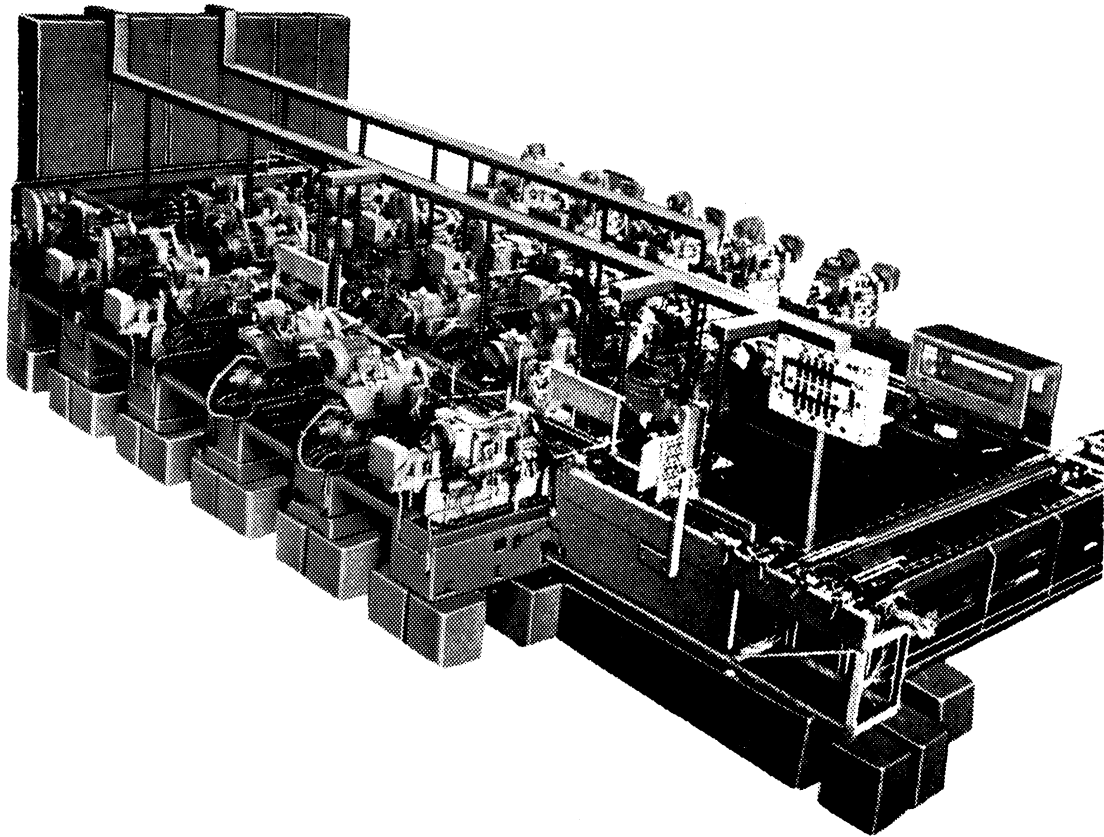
Transfer Machine for Machining Automobile Parts, by Hitachi Seiki Company.
